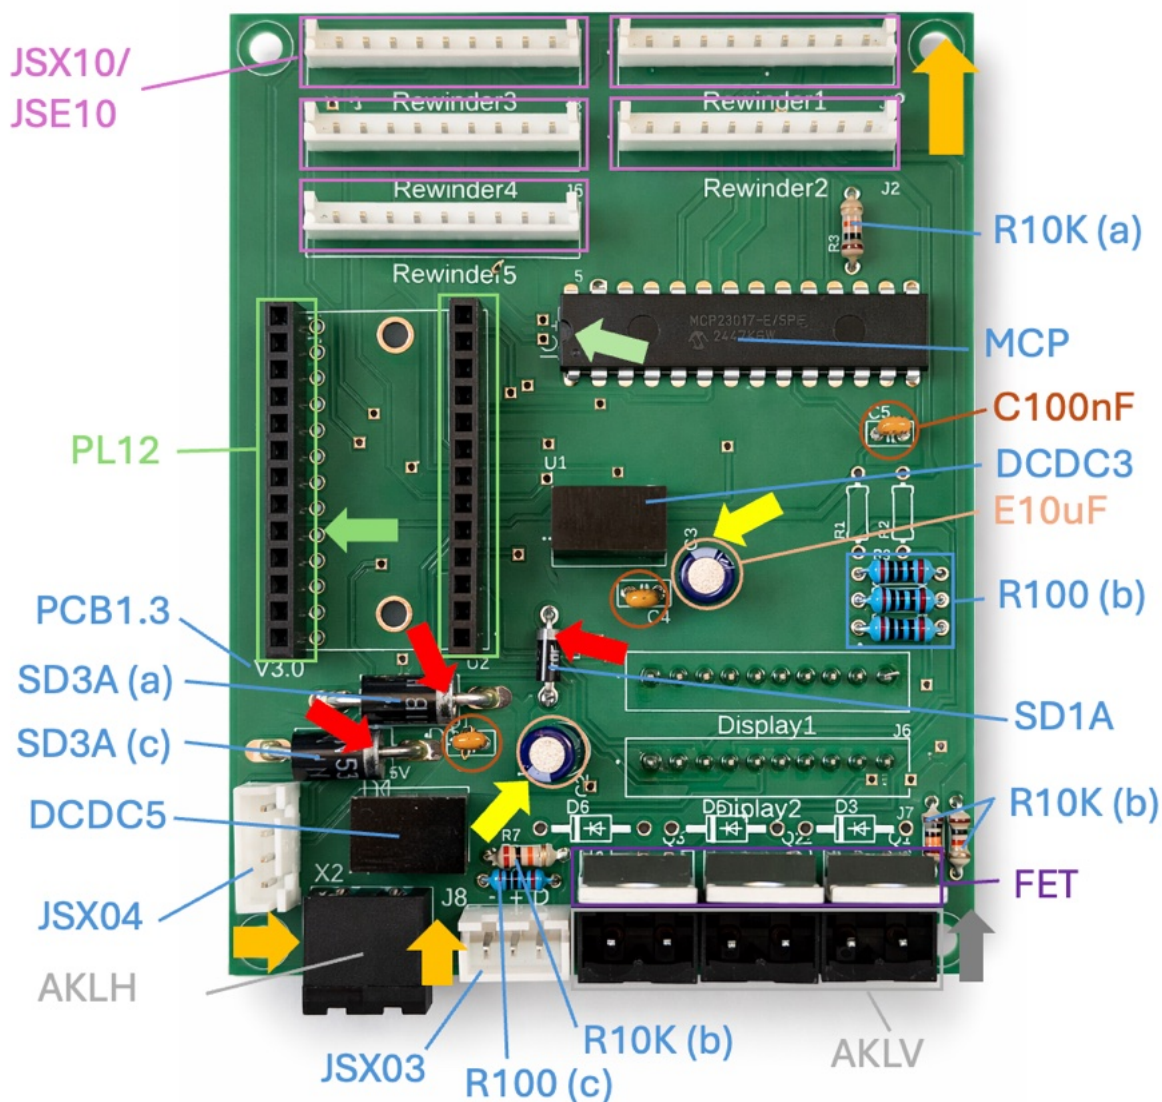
Mainboard PCB1.3 (V3.0) Step 1.
